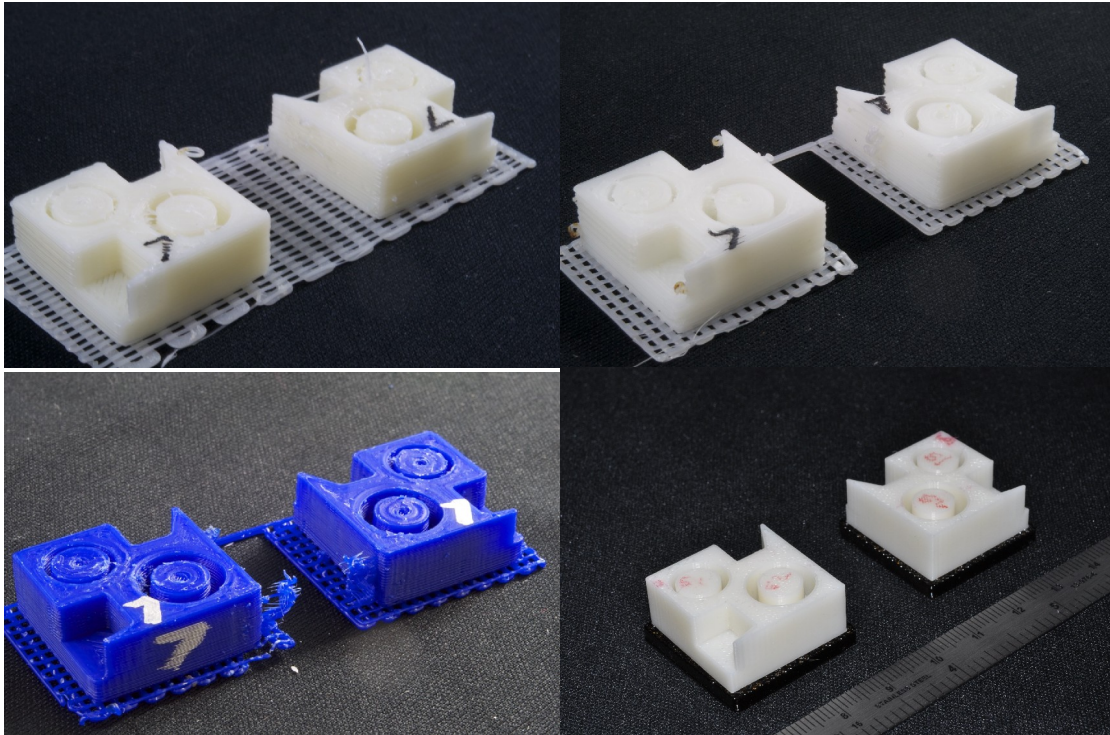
Isometric view of coupons generated by all test machines – Top Left – MakerBot CupCake, Top Right – BFB Rapman, Bottom Left – BFB3000, Bottom Right – Stratasys 1200ES
